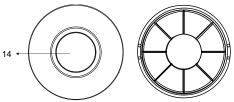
Components - Front View Figure 9. Accessory - Angle cover
